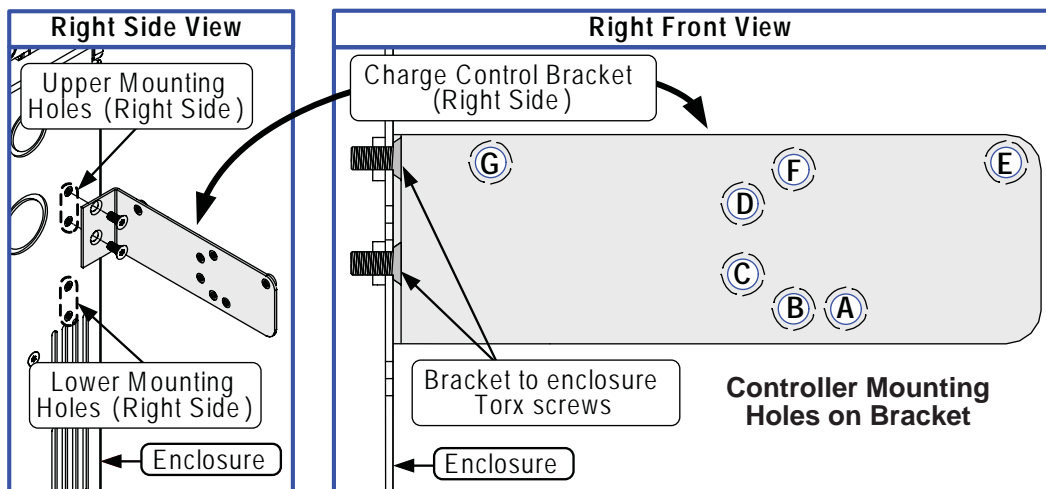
, Holes Used to Mount Bracket on Right Side of Enclosure
